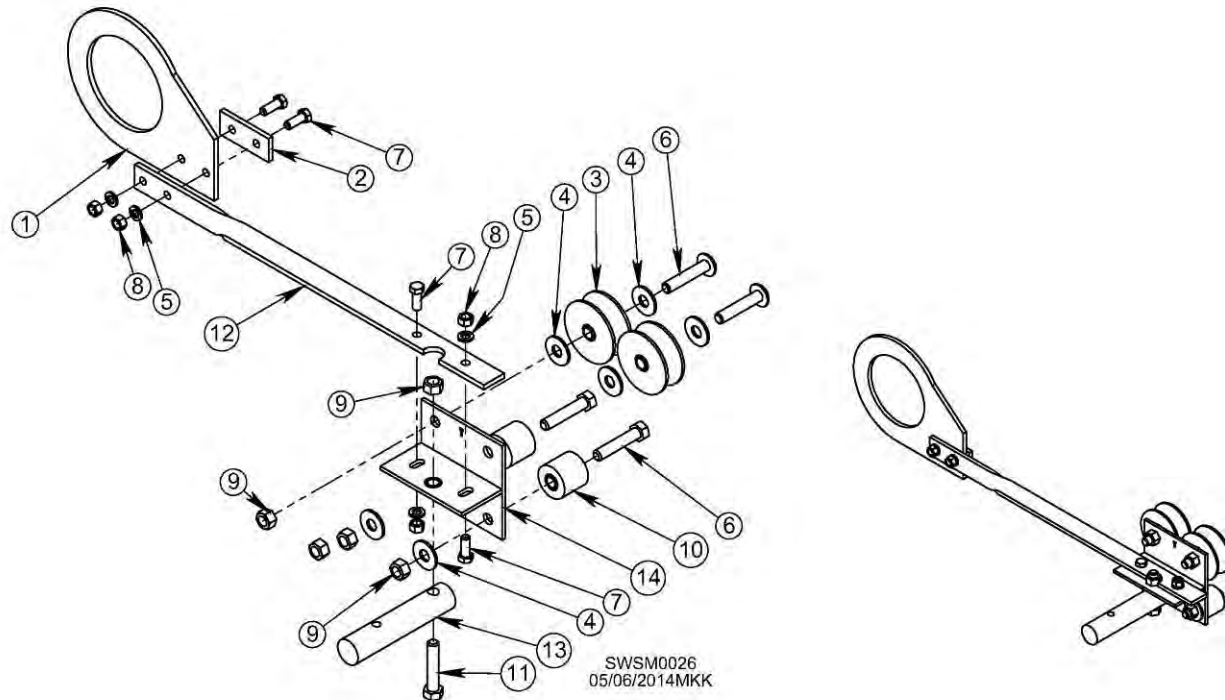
Assembly of Stabilizer Kit Pivot Assembly, Exploded View
